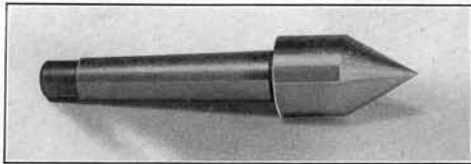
Male Center. 60° included angle, shank Rivett special 3° taper. Furnished hard for tailstock and soft for headstock
